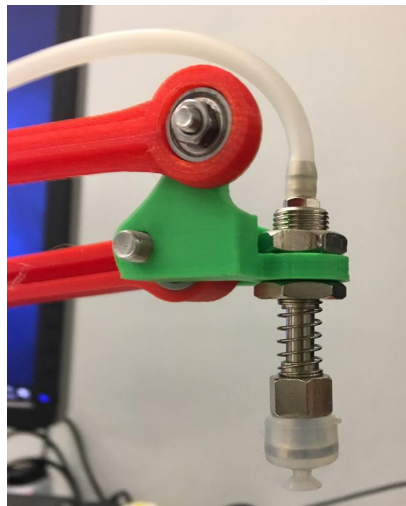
Vacuum gripper installed on the end point of robotic arm
